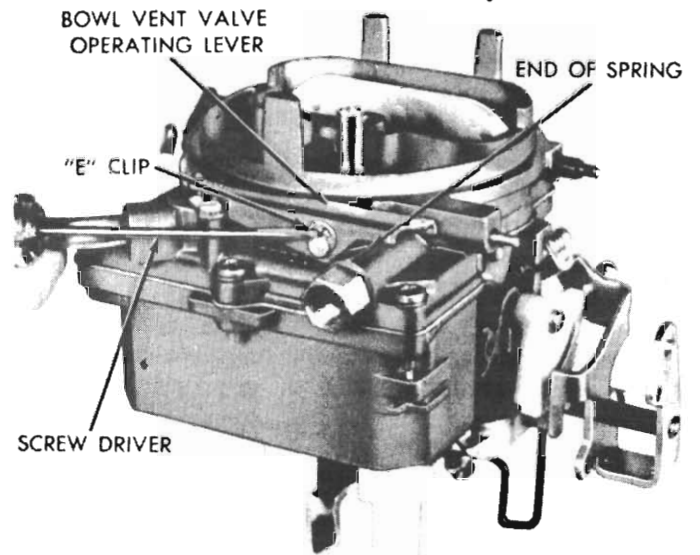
Removing bowl vent valve operating lever "E" clip
